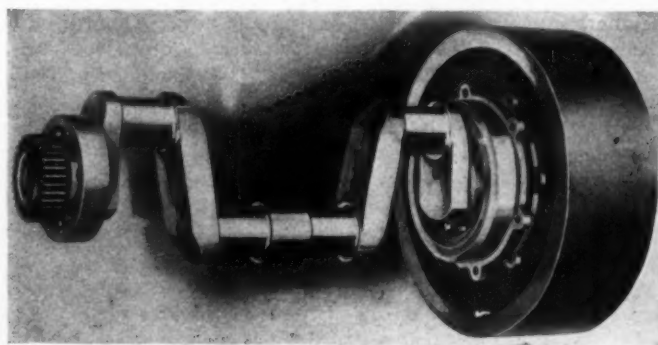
Chalmers Two-Bearing Crankshaft Complete.
